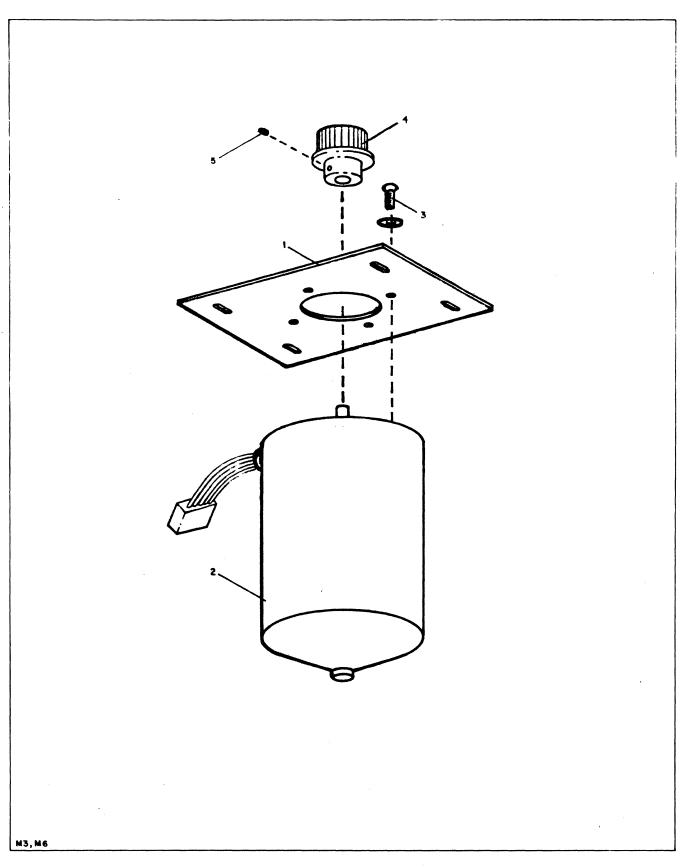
DRIVE MOTOR ASSEMBLY
